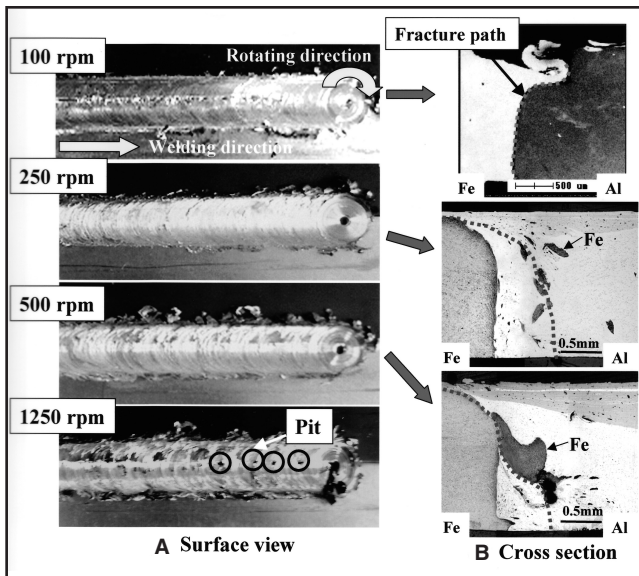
Effects of pin rotation speed: A — surface view; B — cross-sectional structure with the fracture path indicated by a dashed line in the welds.
